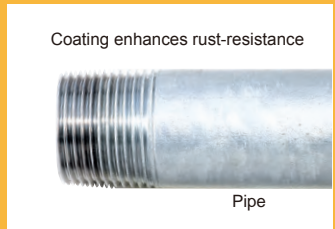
Thread is left with a layer of pipe coating (20-30 μm).
